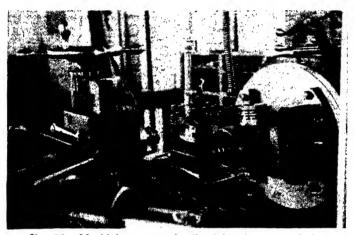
Machining rotary pipe-line joints in a turret lathe.
